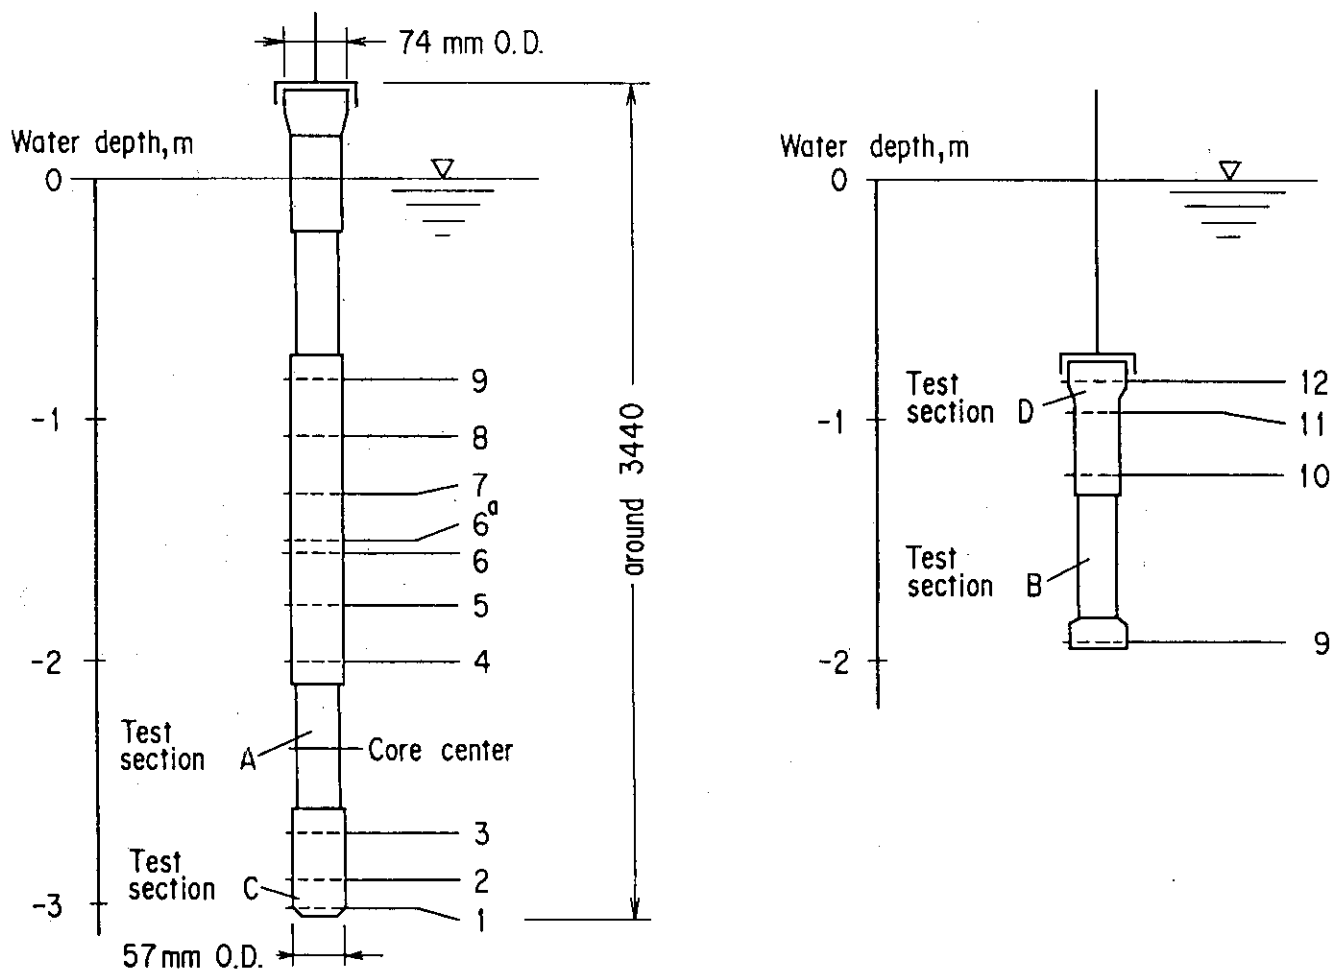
Cutting Locations for the Lower Half of the Inner Tube
